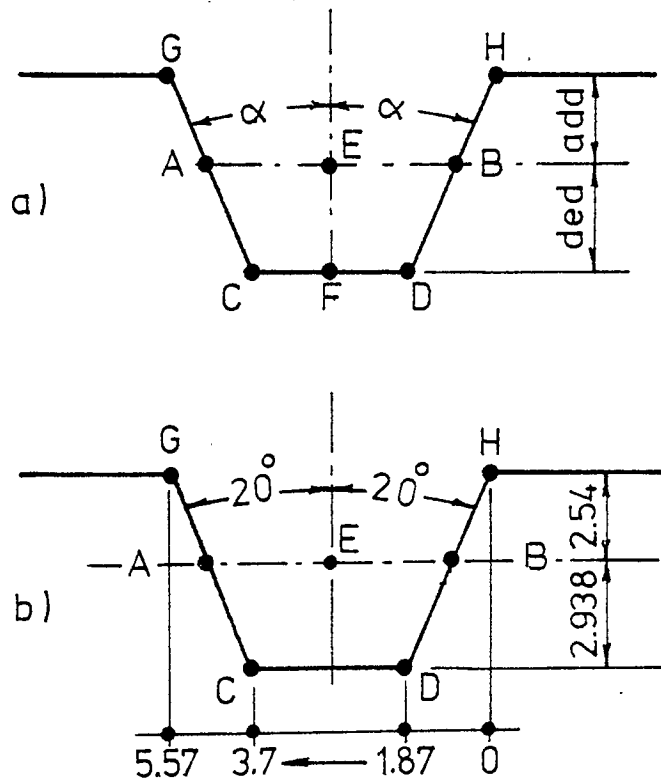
10 D.P. HOB TOOTH DIMENSIONS
